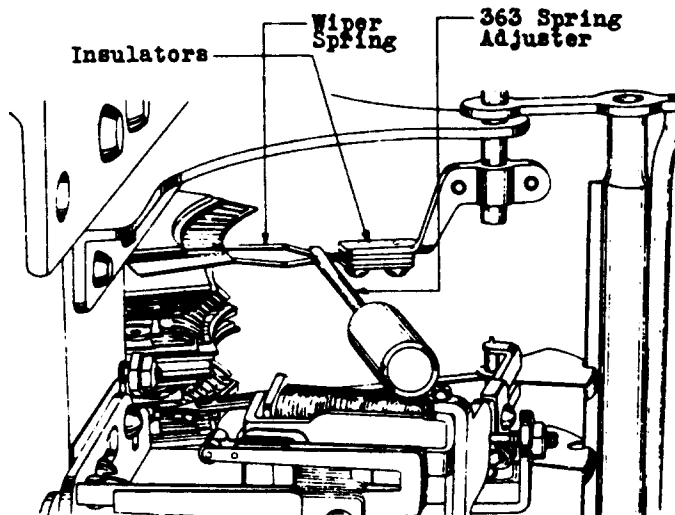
Method of Adjusting the Wiper Springs for Tension
